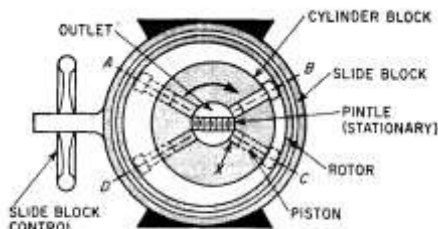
Radial-piston Hydraulic Pump With Rotating Piston Housing [One piston is shown at four positions—A, B, C, and D]
